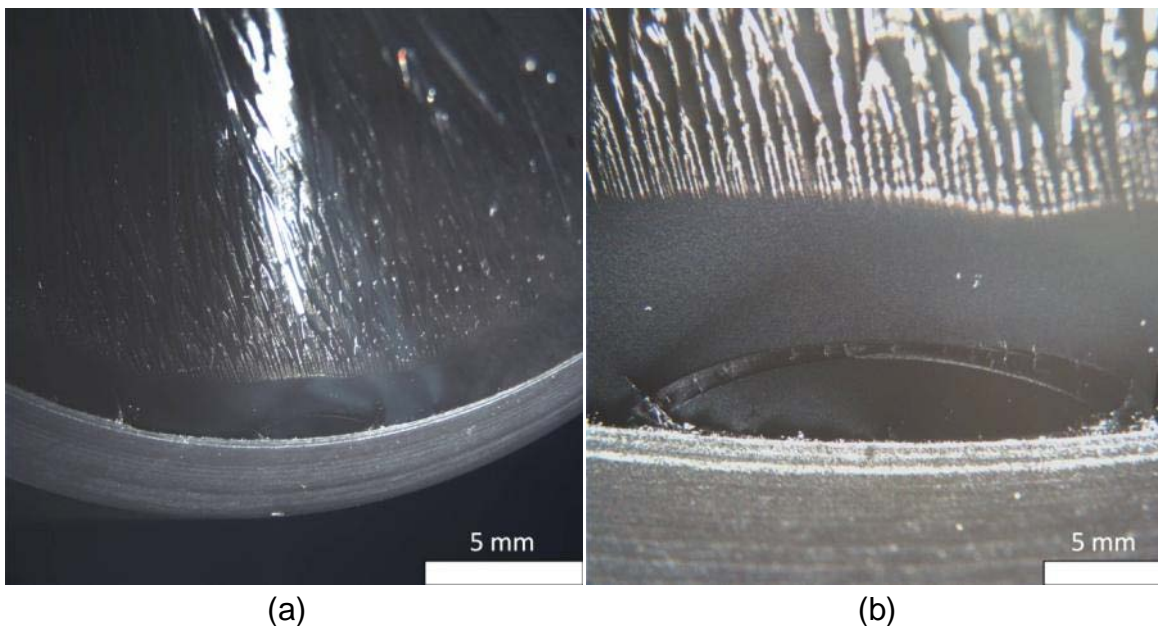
Images showing the fracture surfaces of GB4-5.
